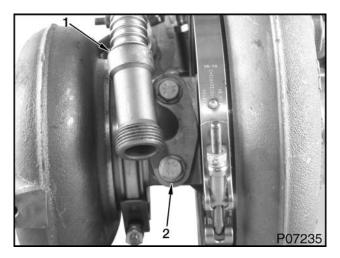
High pressure turbocharger oil return pipe (lower connection)
